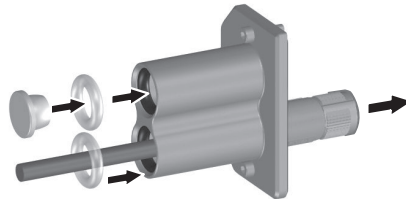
Assembly of IP69K protective housing, without use of the Ethernet connection – dummy plug
